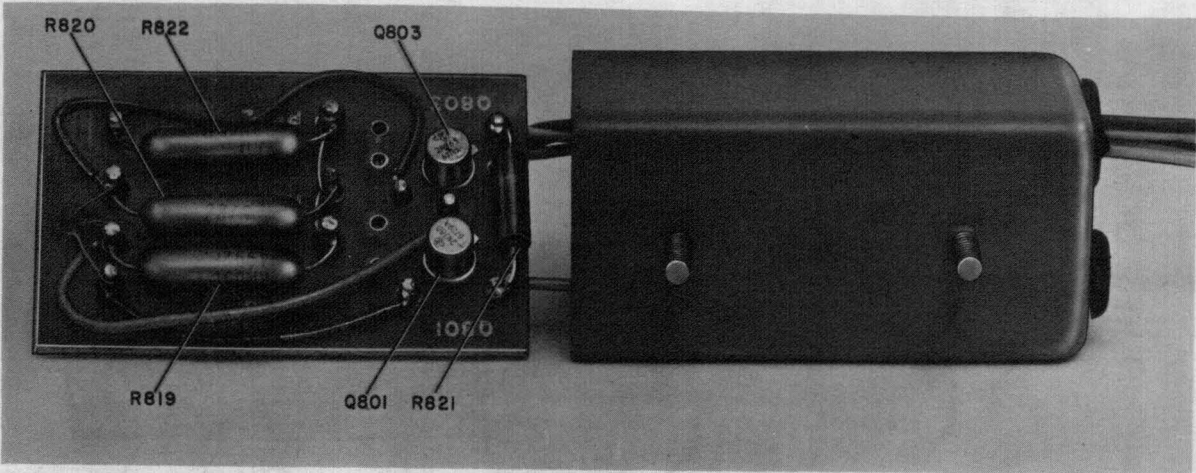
Emitter Follower Assembly, MP801, Rear View
